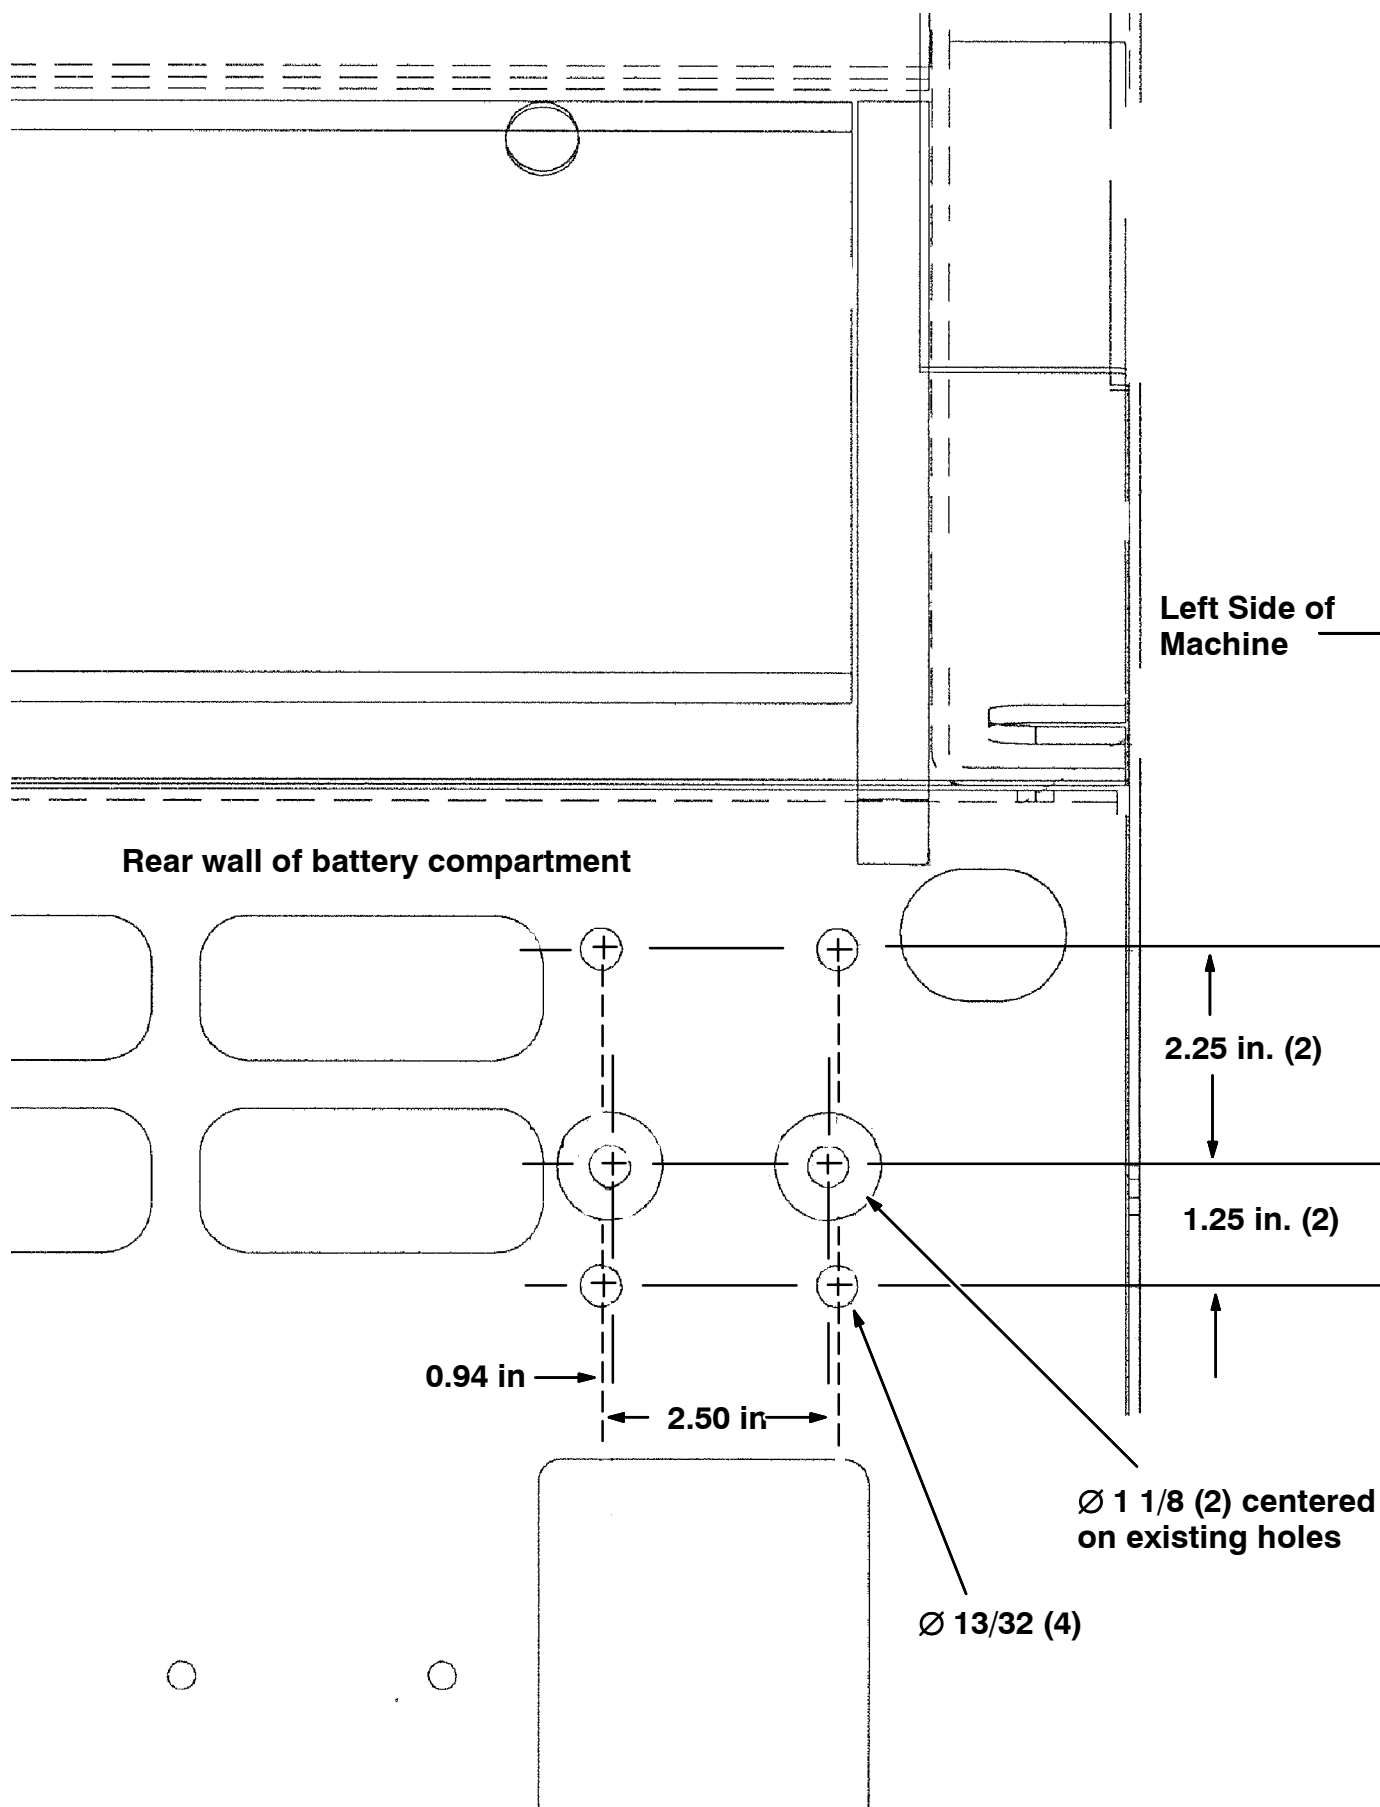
Mounting Hole Locations, Isolator, Hopper Lift Pump
